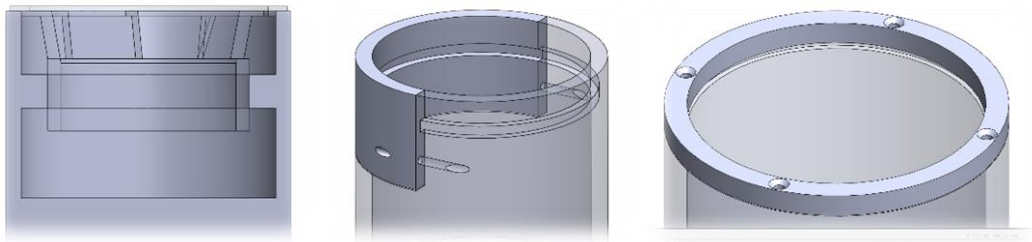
Tight fit around transwell (a) removable side piece (b) screw tightened ring (c)
